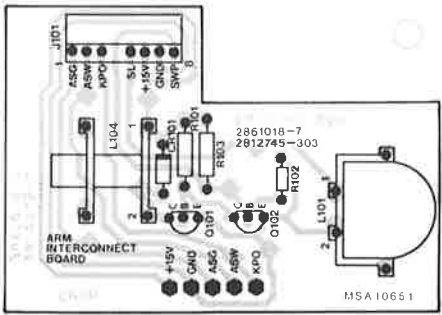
PW Arm Interconnect Circuit Board Assembly
